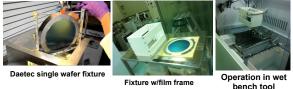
Testing debond with mounted device wafers on film frames occur on single fixture, Teflon® multi-frame fixture and in a wet bench.
